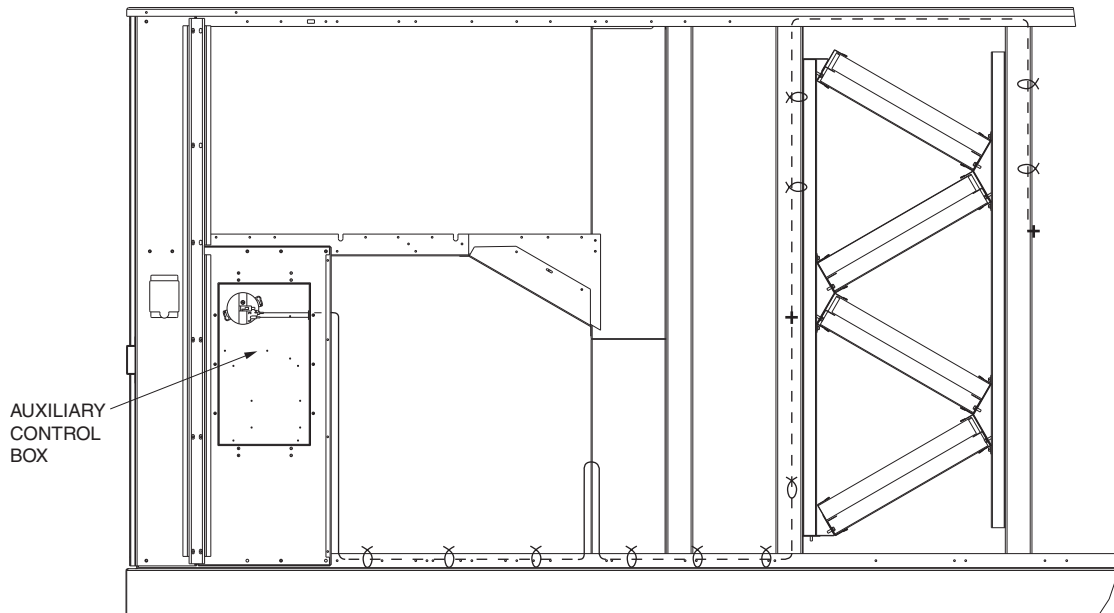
Auxiliary Control Box Location (Sizes 030-050)
